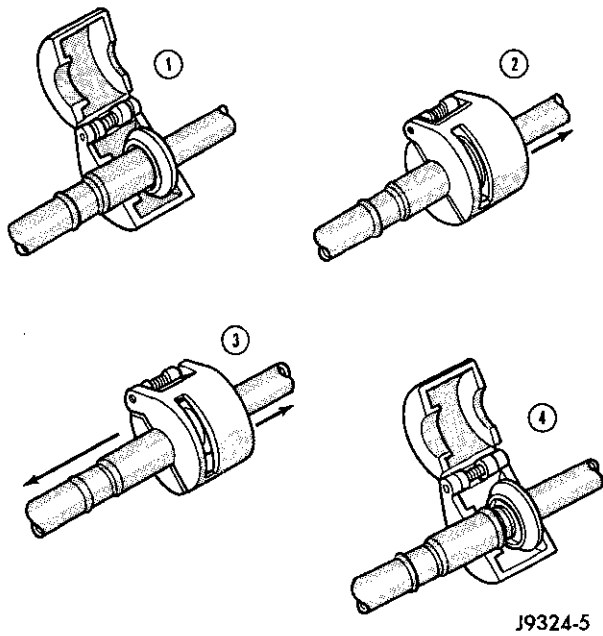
Refrigerant Line Spring-Lock Coupler Disconnect
